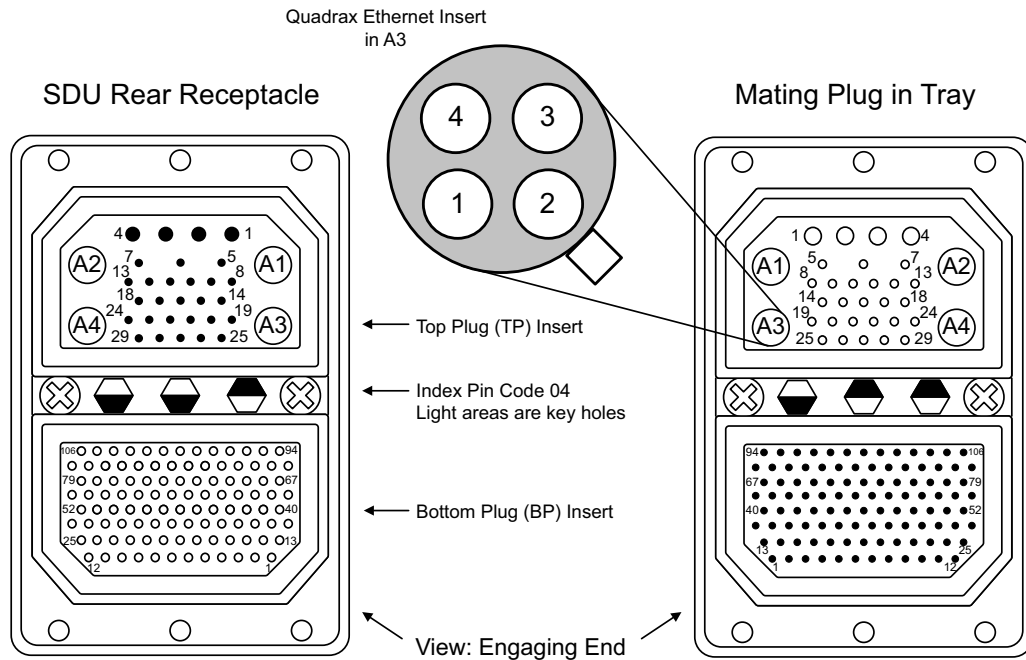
SDU Rear Receptacle and Mating Plug in Tray, Engaging End
